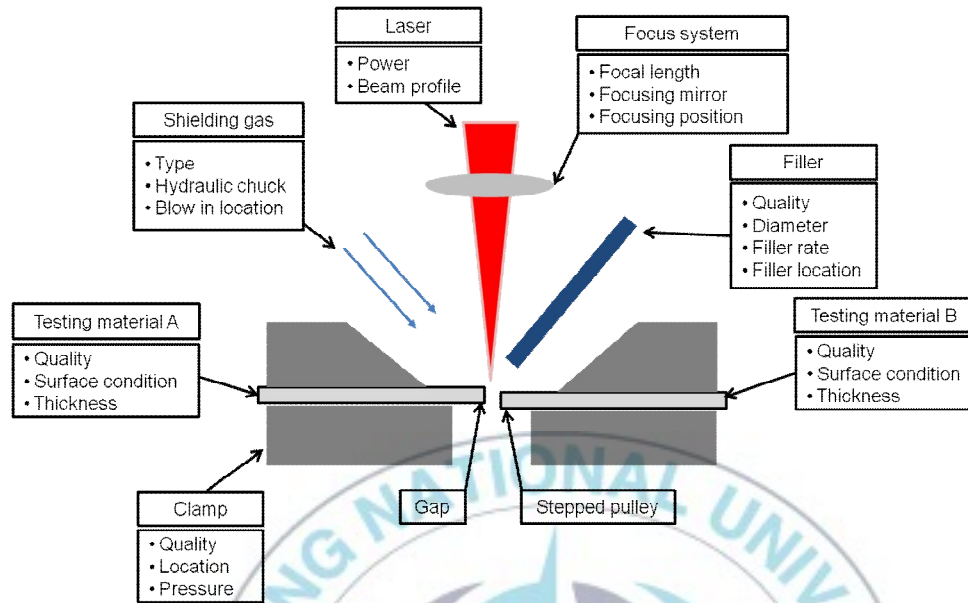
The affecting factor for quality of laser welding
